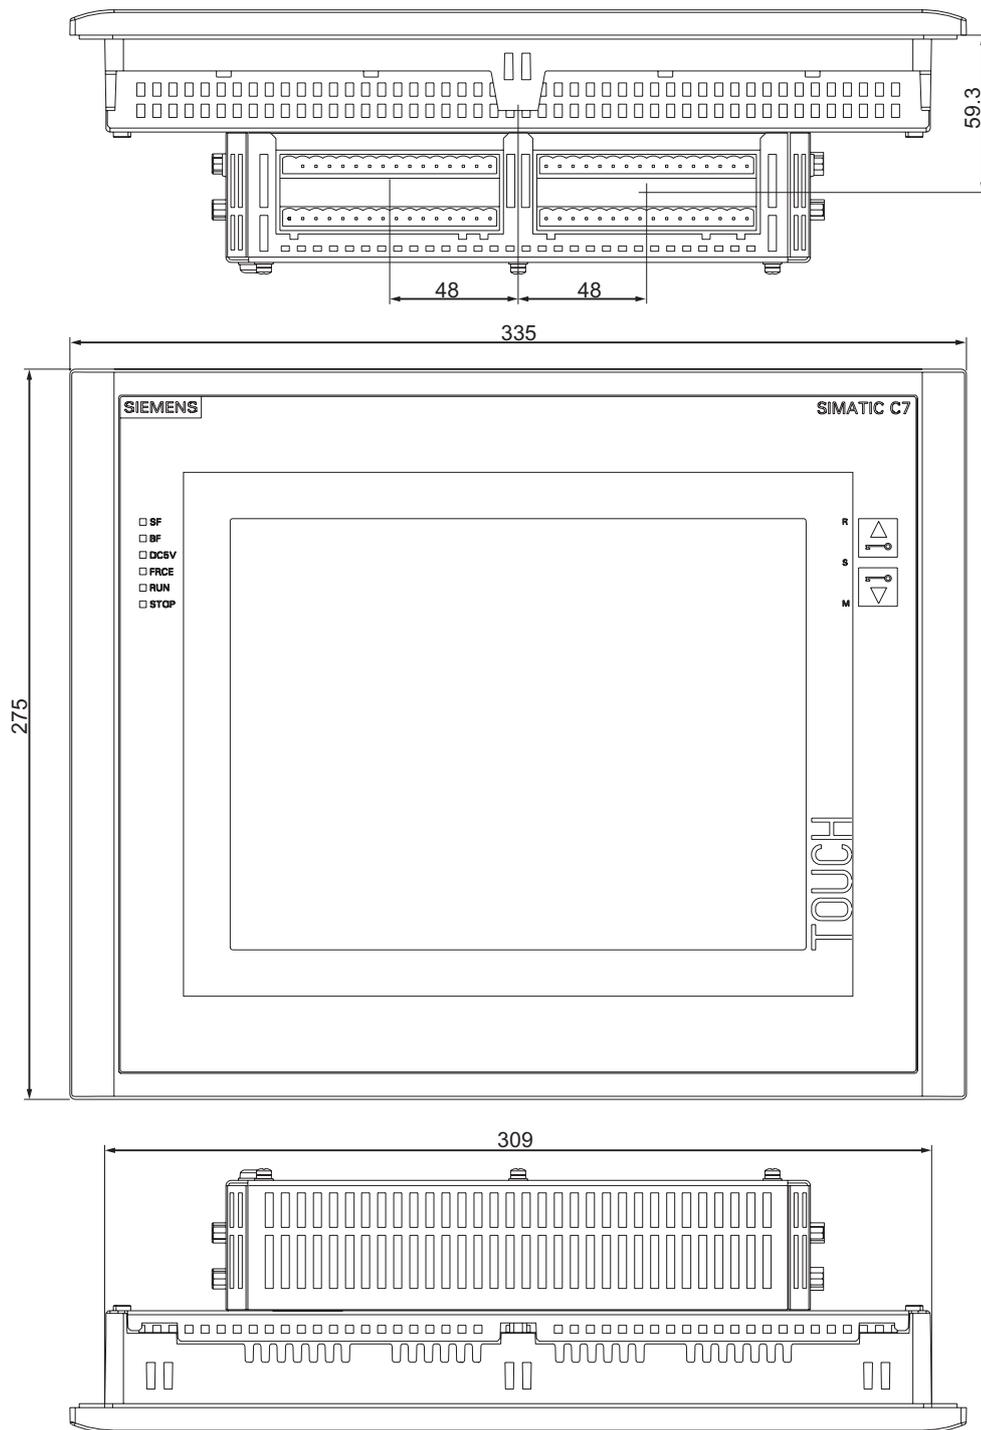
Dimension drawings for the C7-636 Touch (dimensions in mm)
